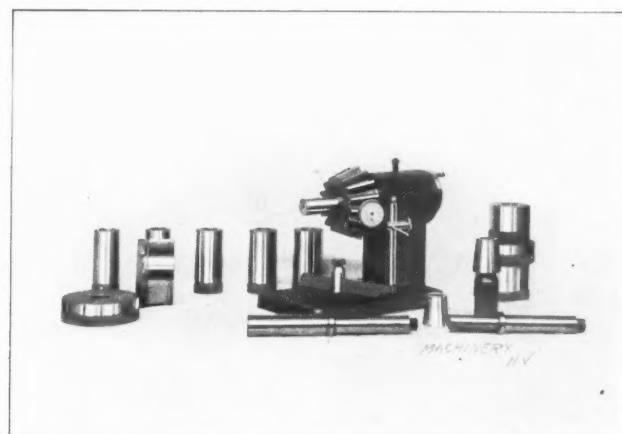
Starrett Indicator and Stand used for Testing the Accuracy of Gears of Various Kinds and Sizes
